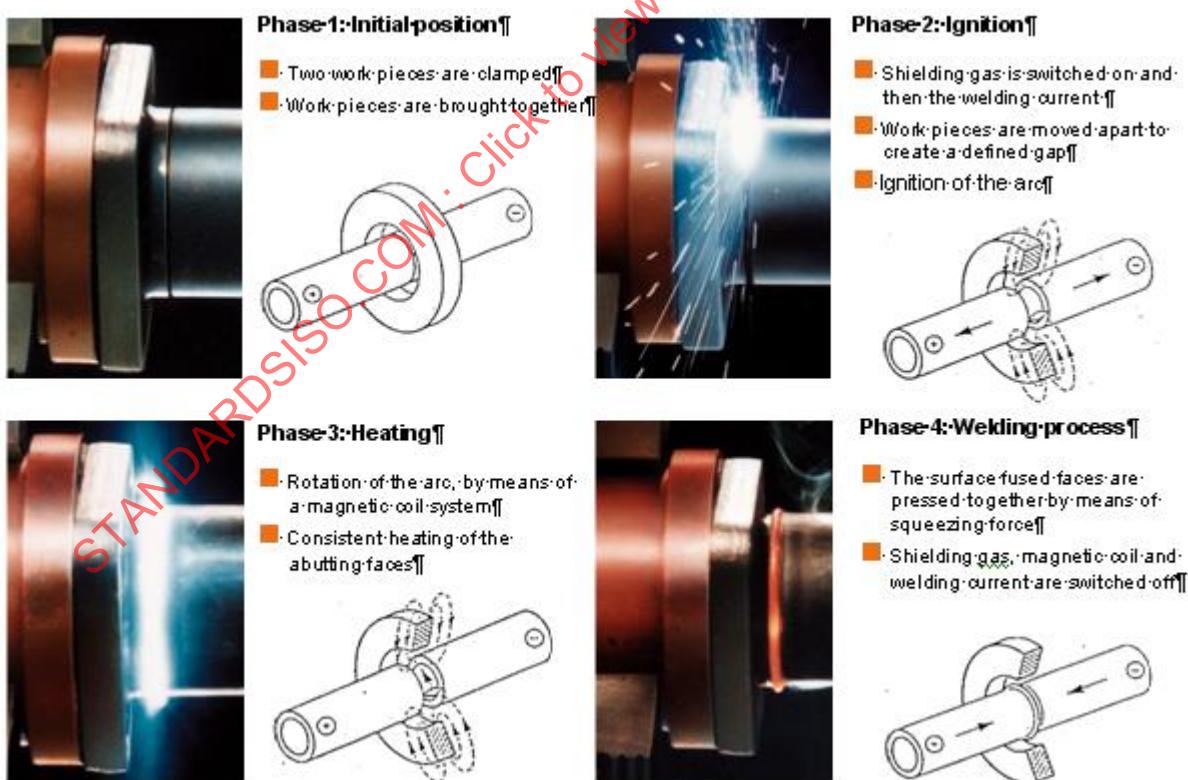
Successive process steps of magnetically impelled arc welding
